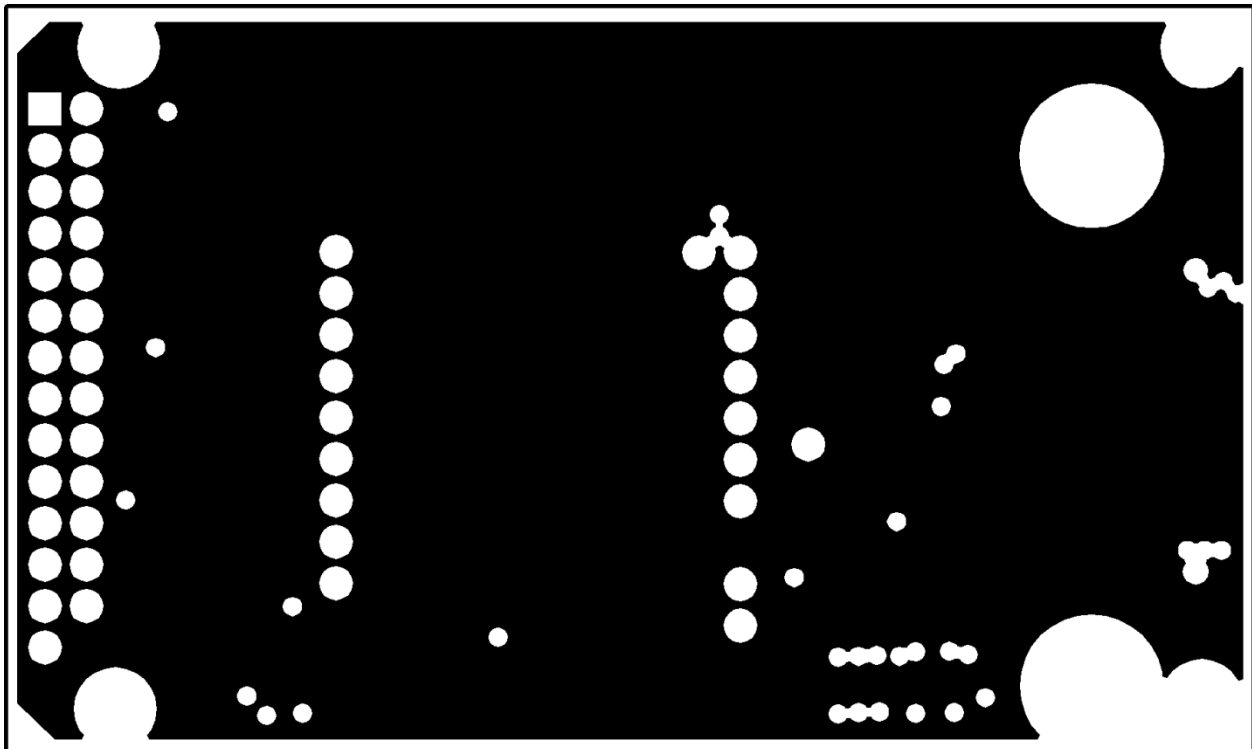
TLV2553EVM PCB Layer 2: GND Plane
